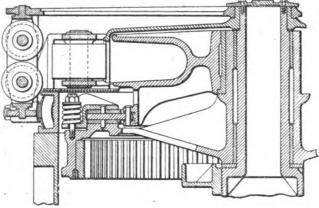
PART SECTION OF CABLE GUIDES, DRUM AND FRICTION CLUTCH.
